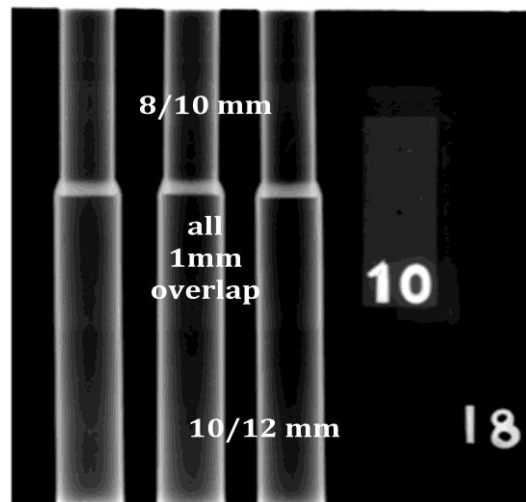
RT Images of 8/10mm # 10/12 mm welded samples
